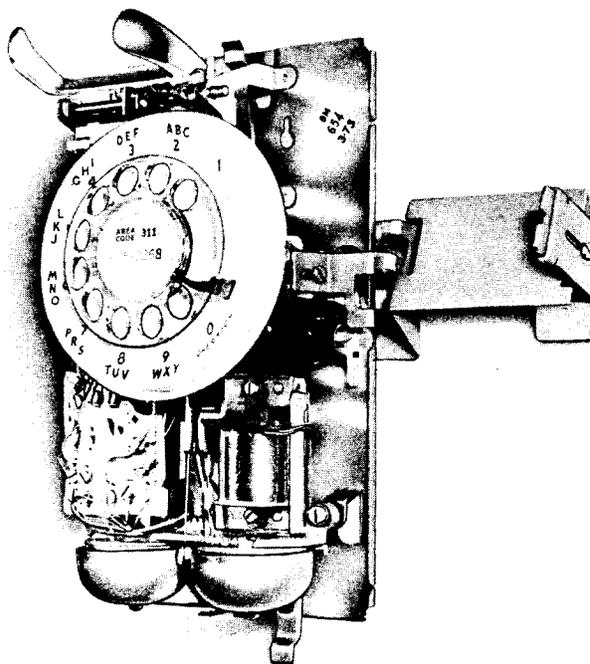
D-180644 Kit of Parts Installed on Wall Telephone Set
